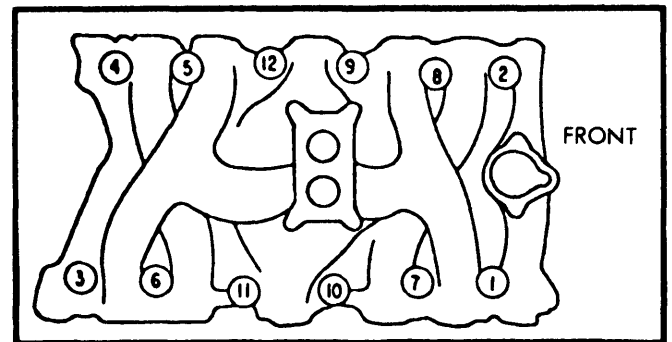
350" VIN R & Diesel Intake Manifold Tightening Sequence
